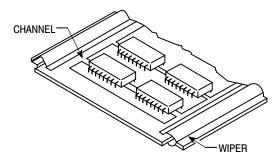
Channel/Wiper Heatsinking on Double Layer Board
